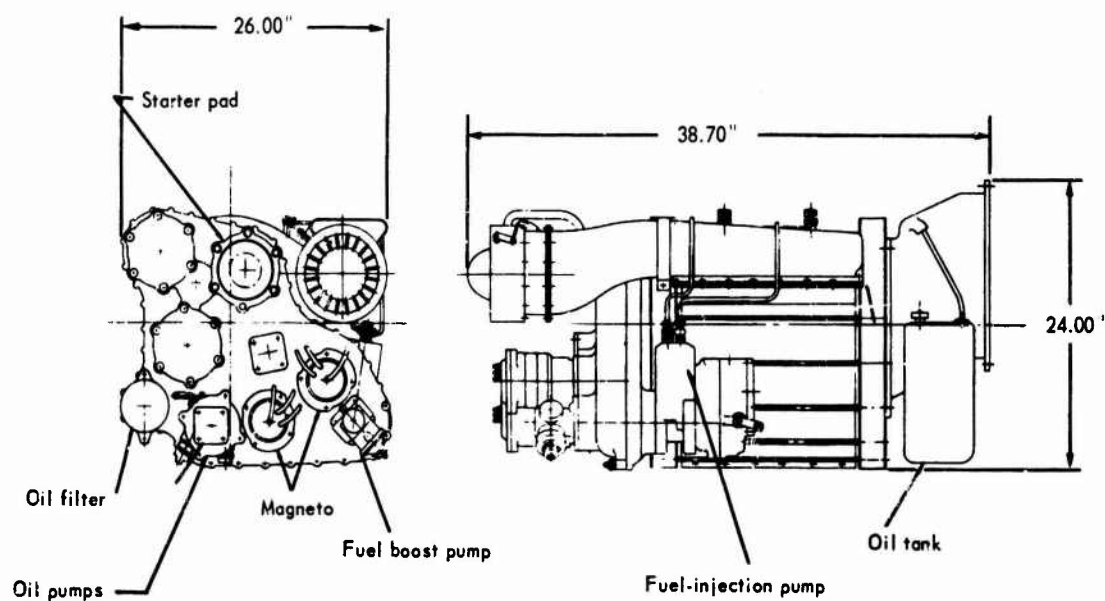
Outline Dimensions of RC2-90Y Rotary-Piston Aircraft Engine
